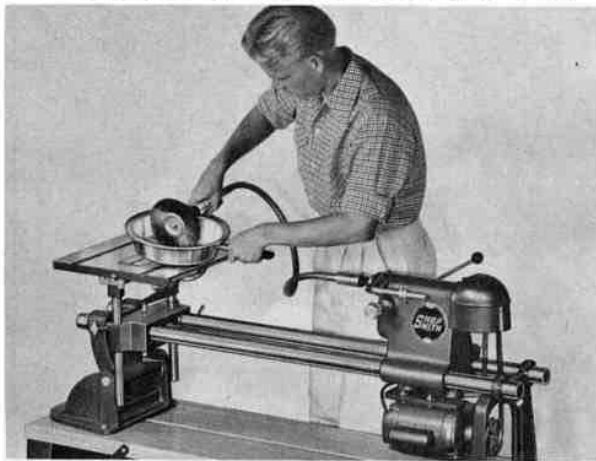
Flexible Shaft accessory used with wire brush attached.
